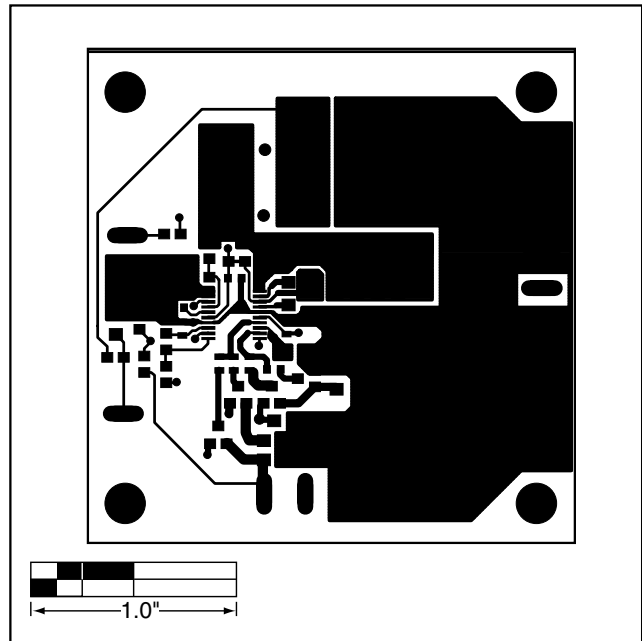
MAX1747 EV Kit PC Board Layout—Component Side
